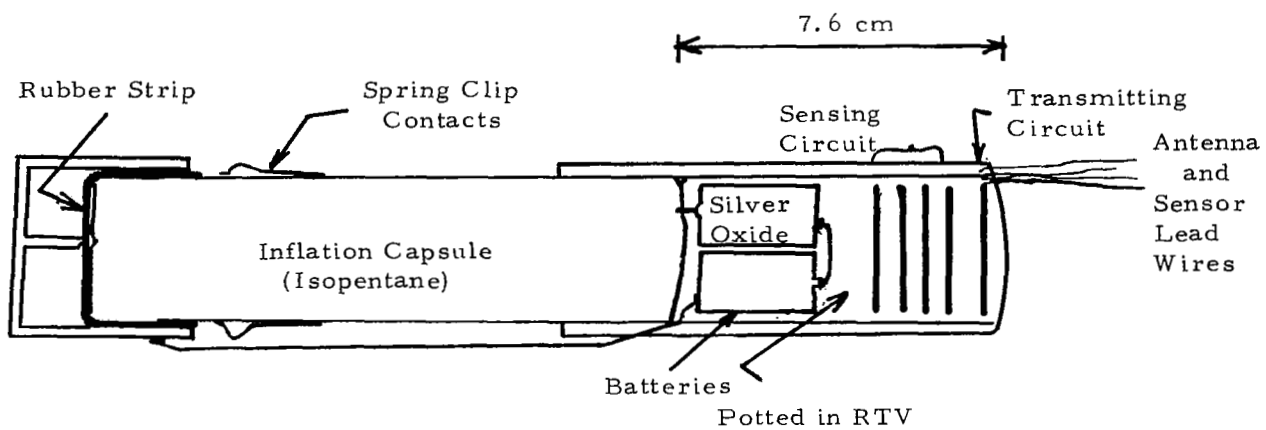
Capsule; Sensing And Transmitting Circuit Assembly
